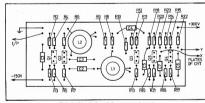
Circuit Board Component Layout. NOTE — Transistors mounted on copper side.
